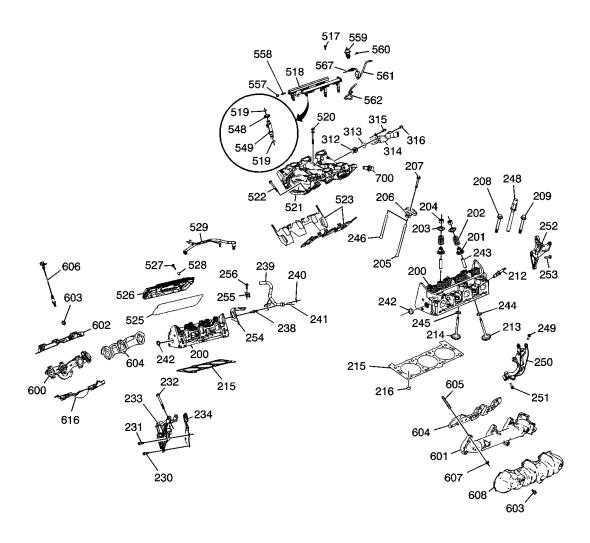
Lower Intake Manifold, Cylinder Head & Components Courtesy of GENERAL MOTORS CORP.
